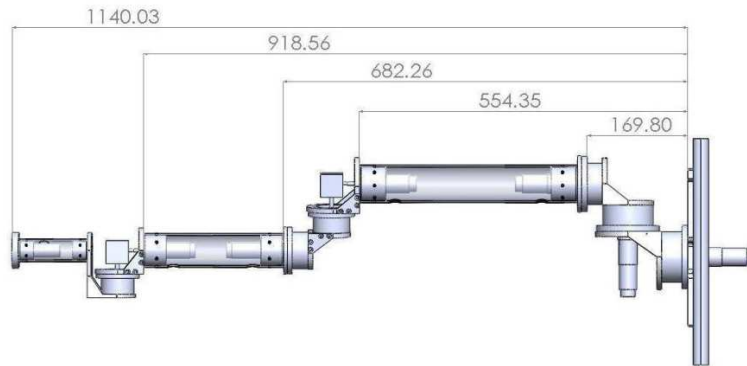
CAD Drawing of WMRA-II Robotic Arm
